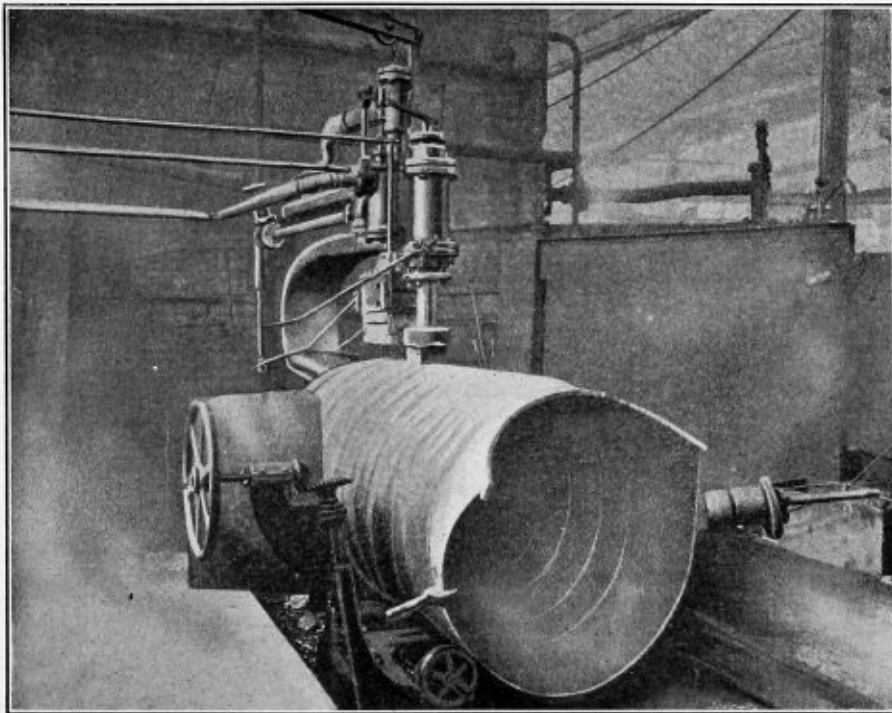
WELDING MACHINE FOR CORRUGATED FURNACES.
